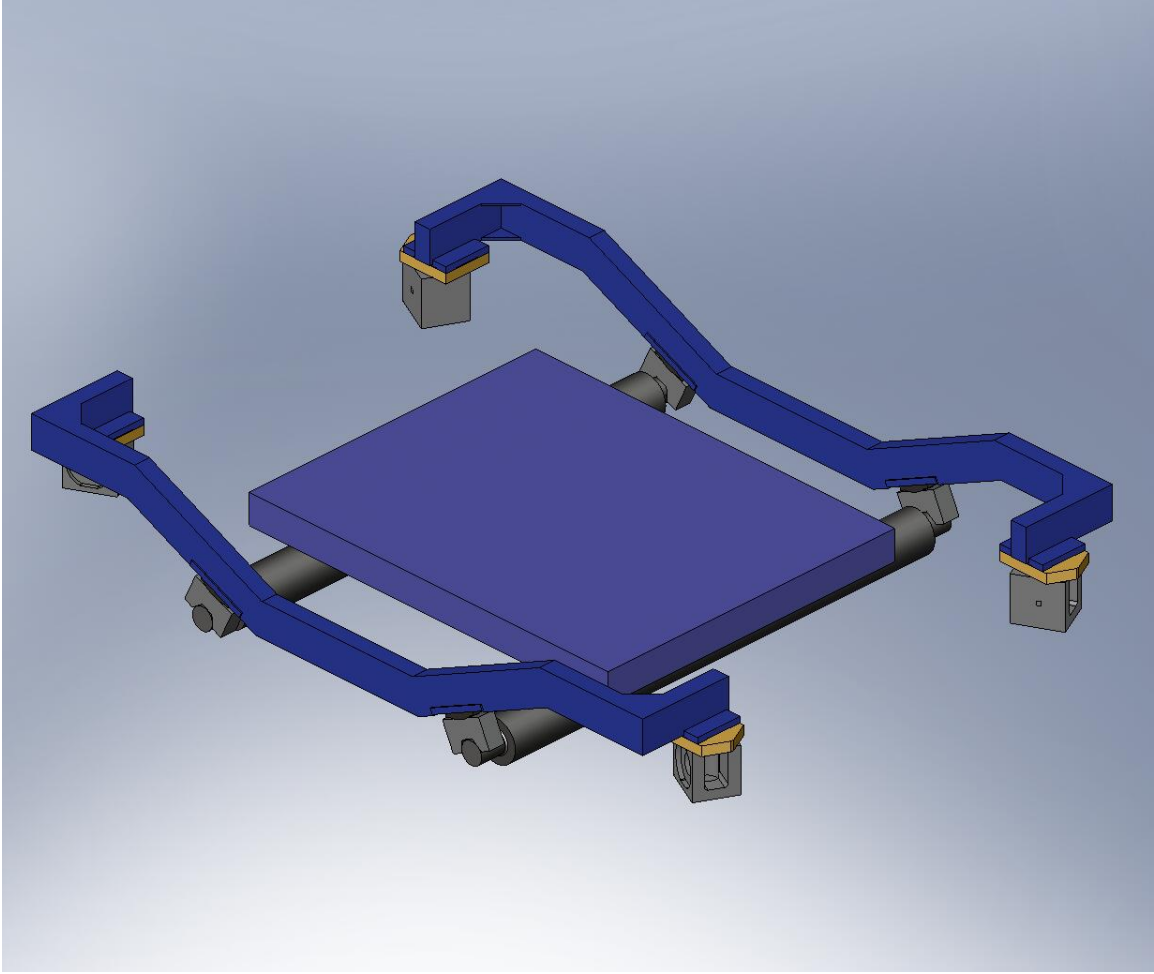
Full Support Structure assembly, for the existing Crossbeam design.
